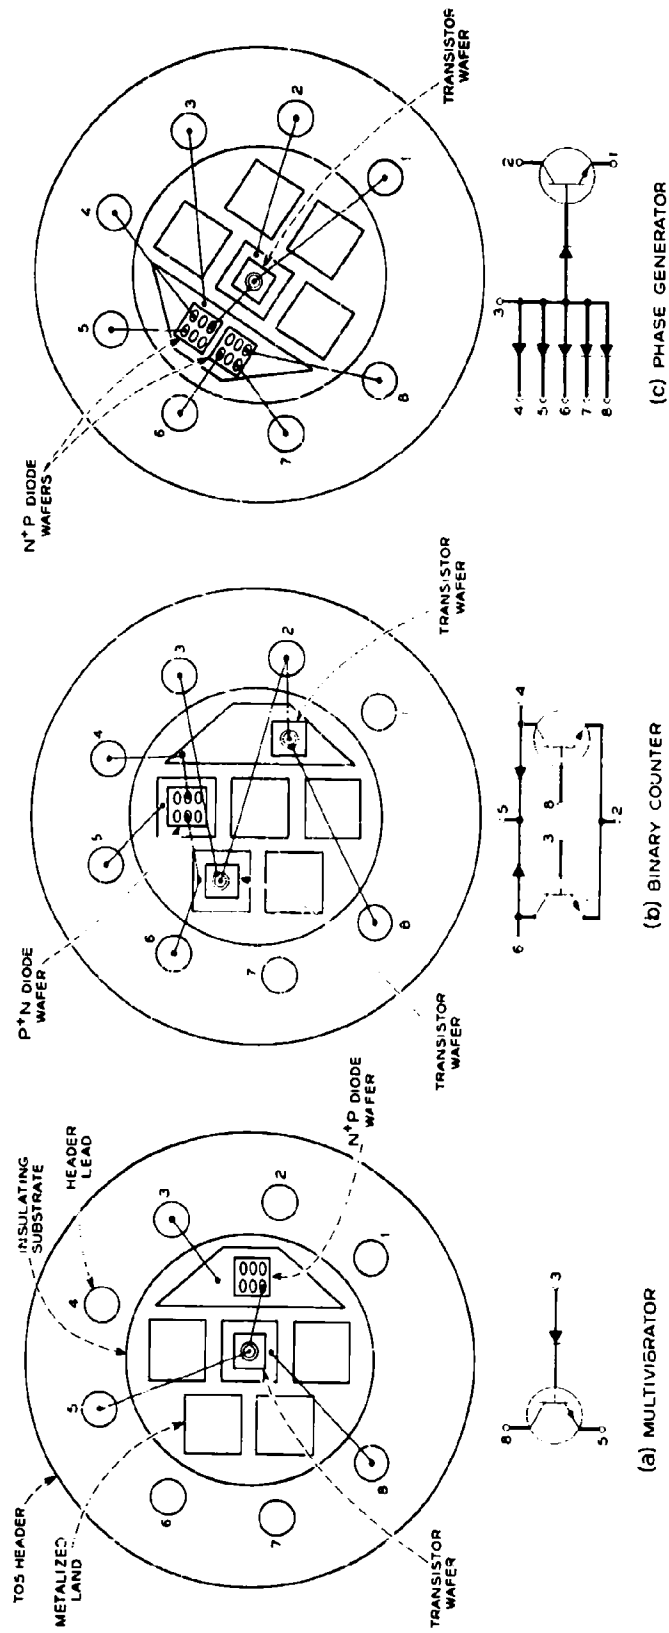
Internal package design using metallized ceramic wafers bonded to header platform.
